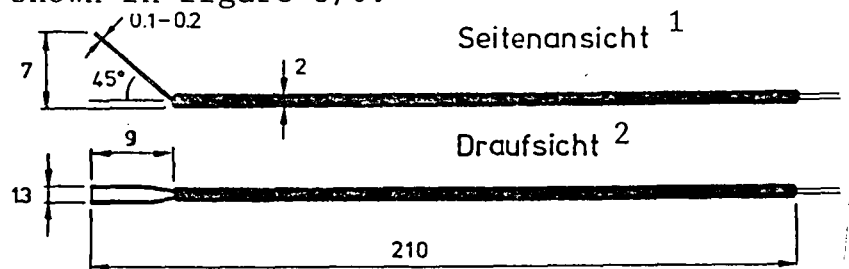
/1: Dimensions of the Hot-Wire Probe (mm)
